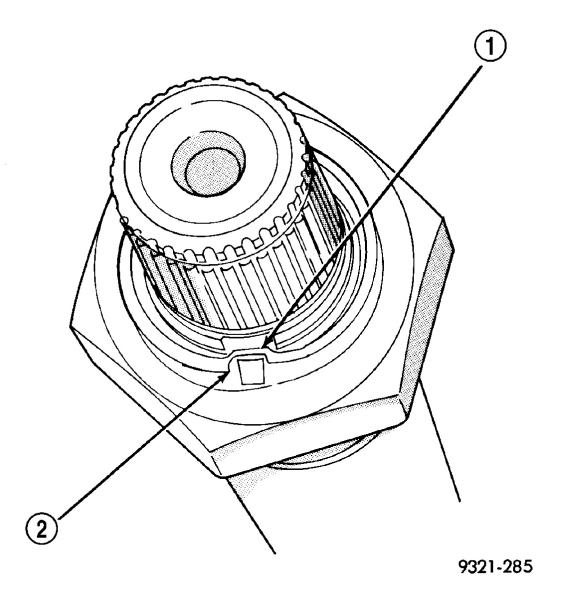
Identifying Bottomed In Slot & Correctly Staked Nut Courtesy of CHRYSLER LLC
